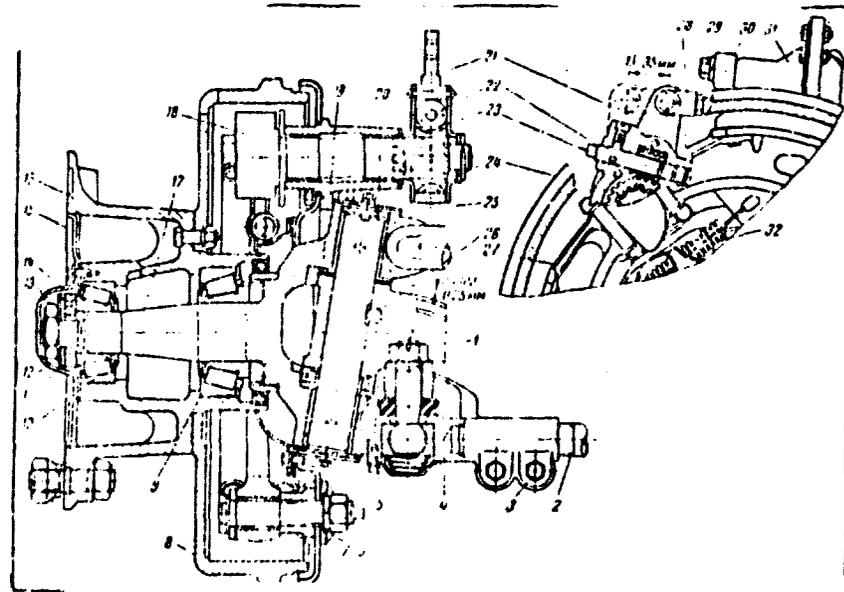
Brake Mechanism of Front Wheels of ZIL-130: 1, front axle; 2, transverse steering link; 3, bolt; 4, tip; 5, journal bearing; 6, nut; 7, brake drum axis; 8, brake drum; 9 and 10, hub bearings; 11, locking ring; 12, lock washer; 13, counter nut; 14, washer nut; 15 and 25, caps; 16, hub; 17, rotating pin; 18, spreader cam; 19, adjusting shim; 20, king pin; 21, adjusting lever; 22, worm axis; 23, worm; 24, gear; 26, pin; 27, brake shoe; 28, fork pin; 29, counter nut; 30, shaft; 31, brake cylinder; 32, brake shoe retracting spring
